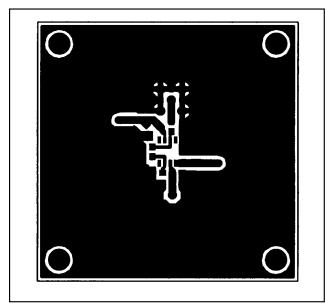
MAX4104 EV Kit (SO) PC Board Layout— Component Side
